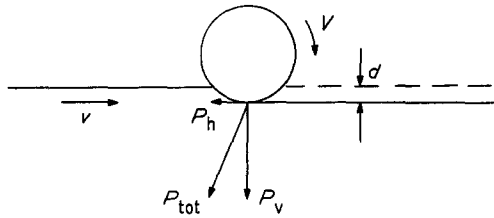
Definition of machine parameters and grinding forces occurring during grinding.
